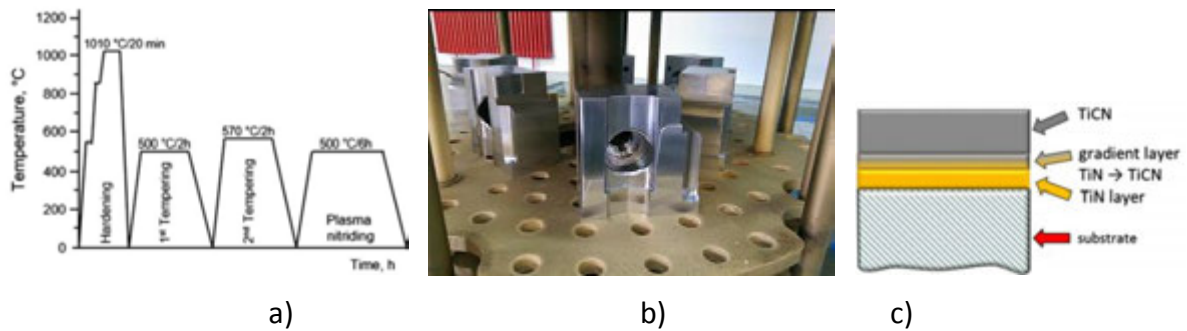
Heat treatment and coating of the hot work tool steels [18]: a) Diagram of the base heat treatment of hot work tool steel X37CrMoV5-1, b) Tool segments for aluminum die-casting mold, c) The structure of a gradient layer TiN/TiCN coating
